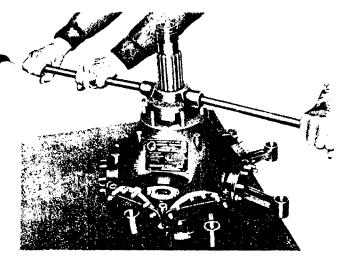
Tightening Front Crankshaft Thrust Bearing Nut
